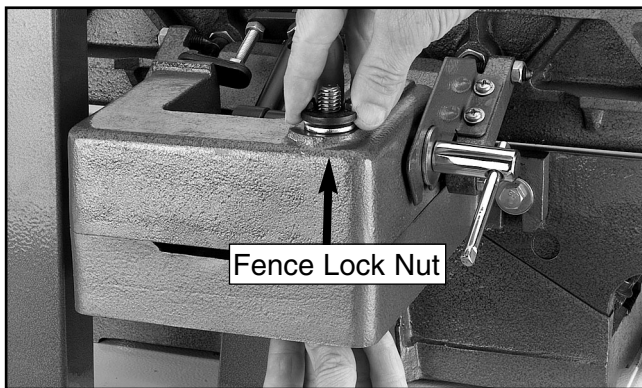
Removing the fence lock nut so the sliding surfaces can be cleaned.
